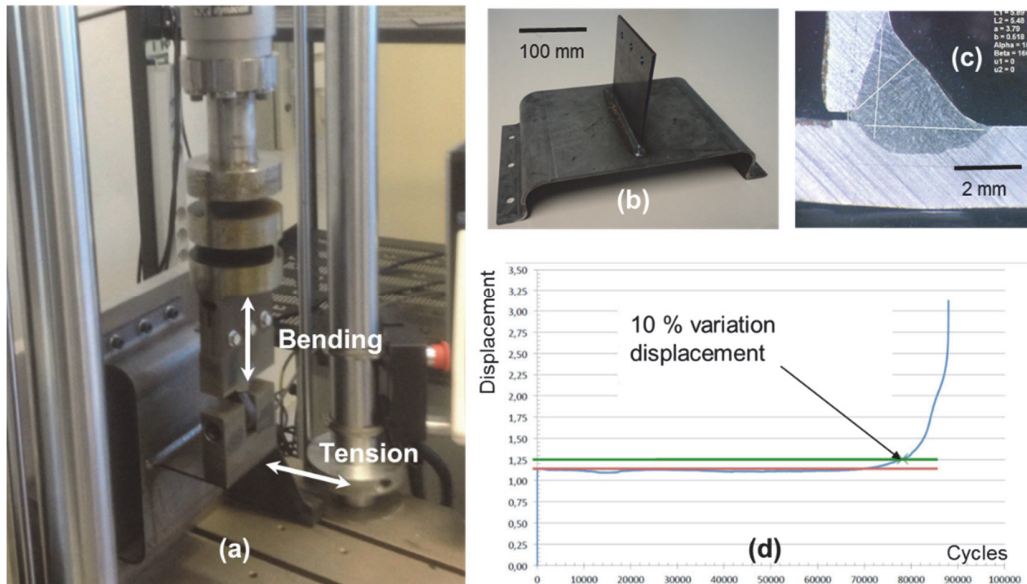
(a) Fatigue device with grip system; (b) welded sample; (c) cross section of welded junction; (d) arrest criterion.
